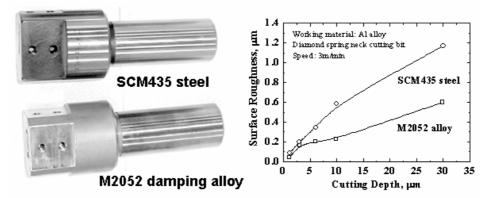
Surface roughness improvement by different cutting tool holder in the spring neck working system.
